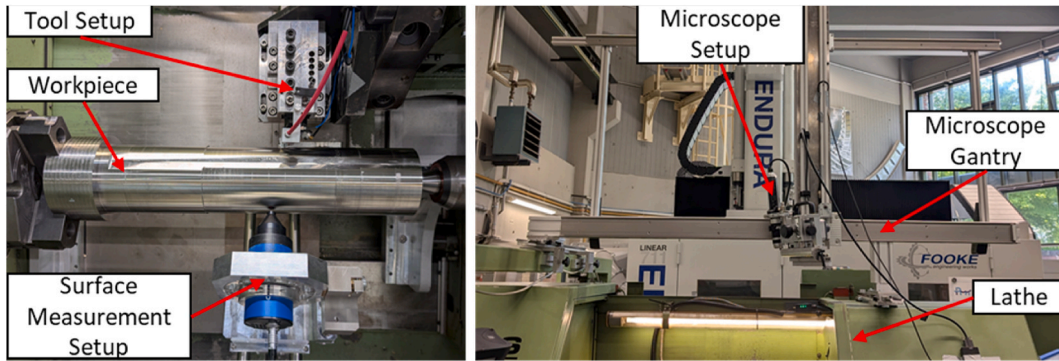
Overview of the machine setup (left: inside the lathe chamber, right: on top the lathe).
